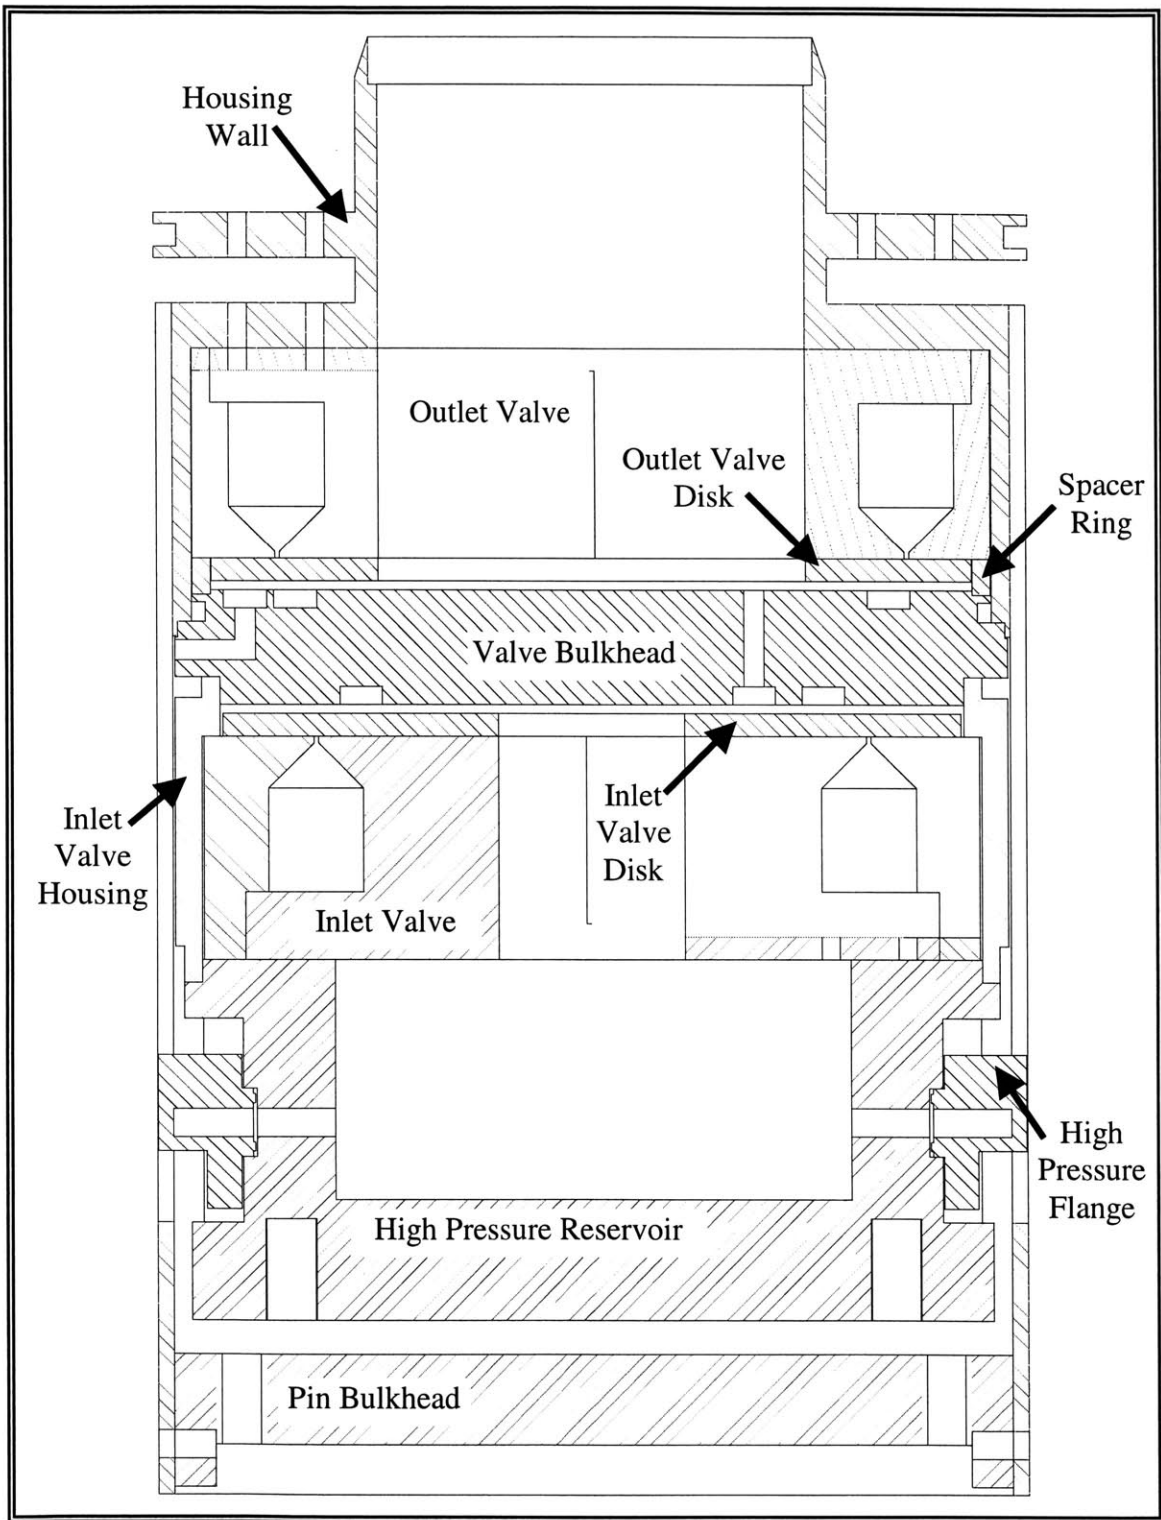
An assembly drawing of the cold end shows its various constitutive internal parts as discussed in Chapter 6
